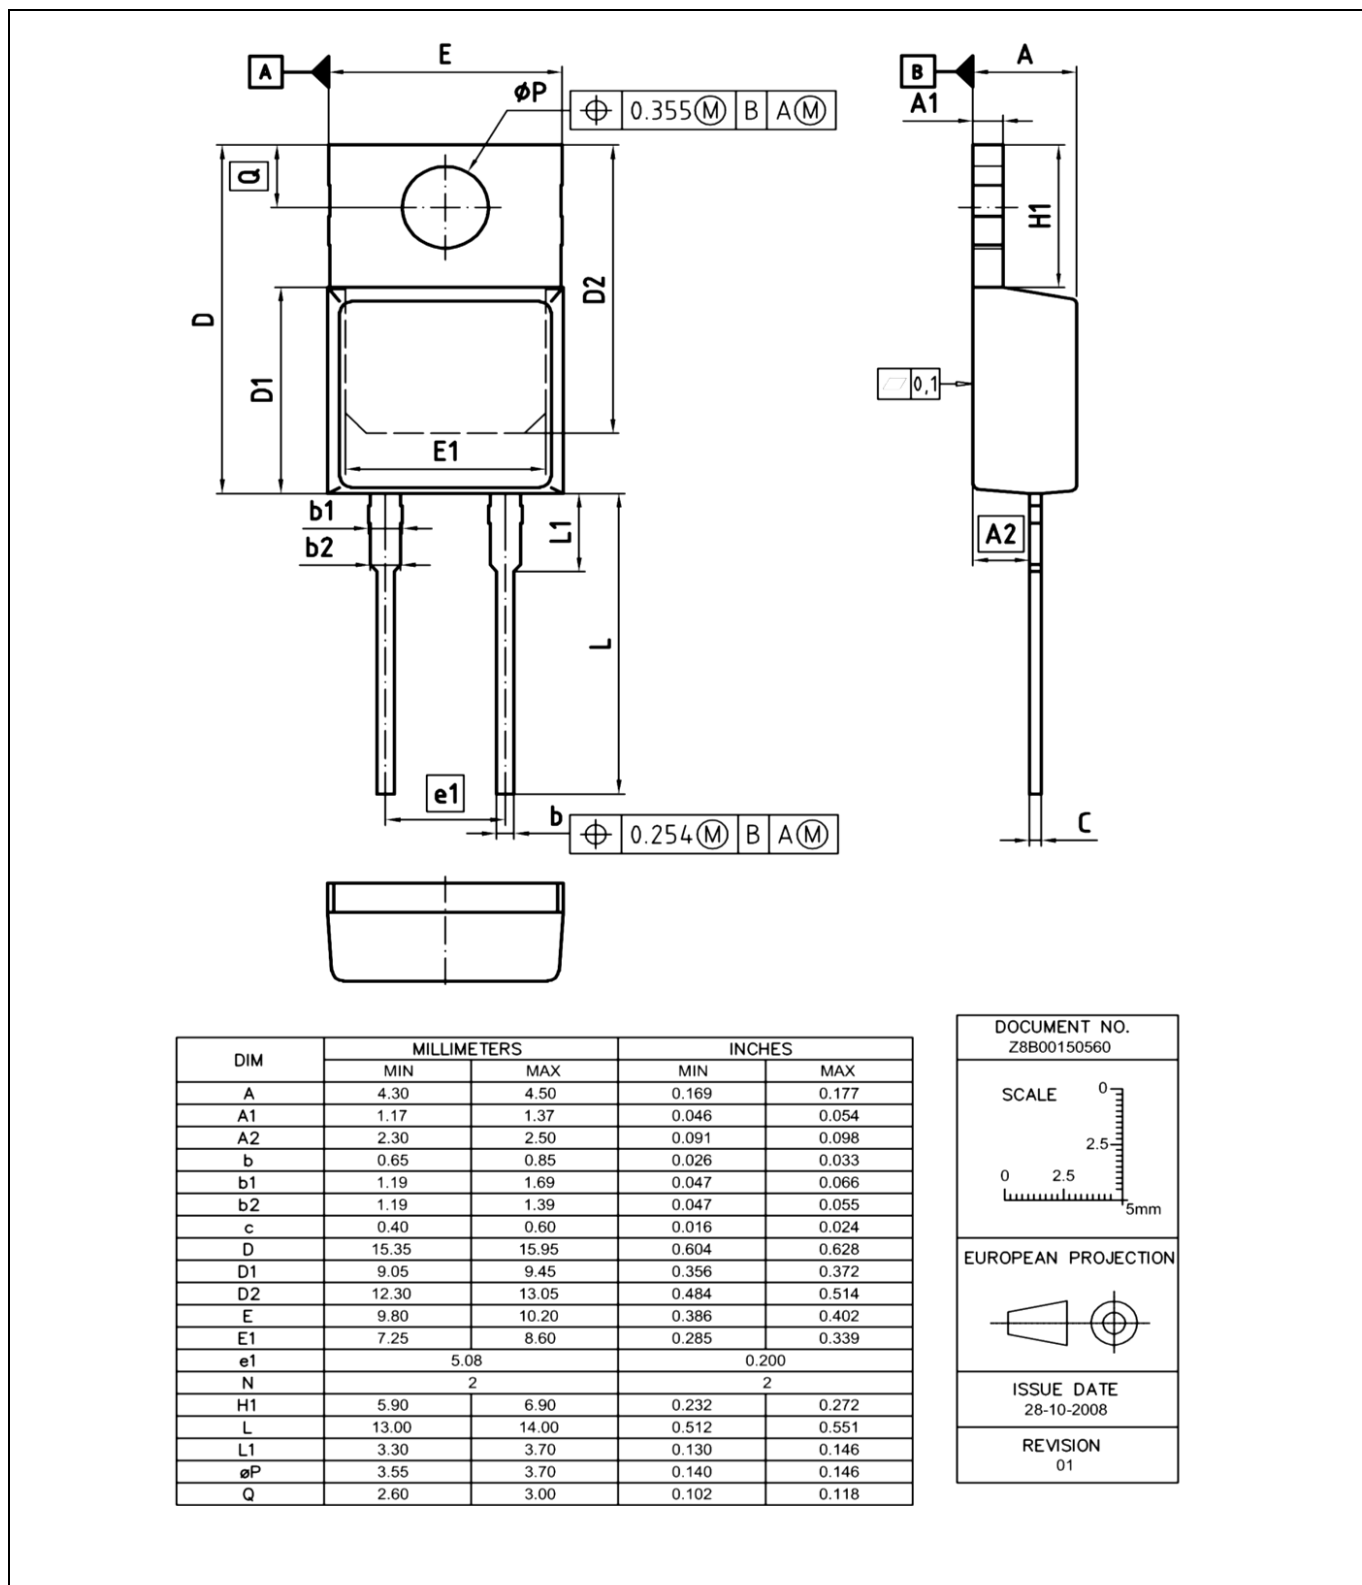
Outlines of the package PG-TO220-2, dimensions in mm/inches
